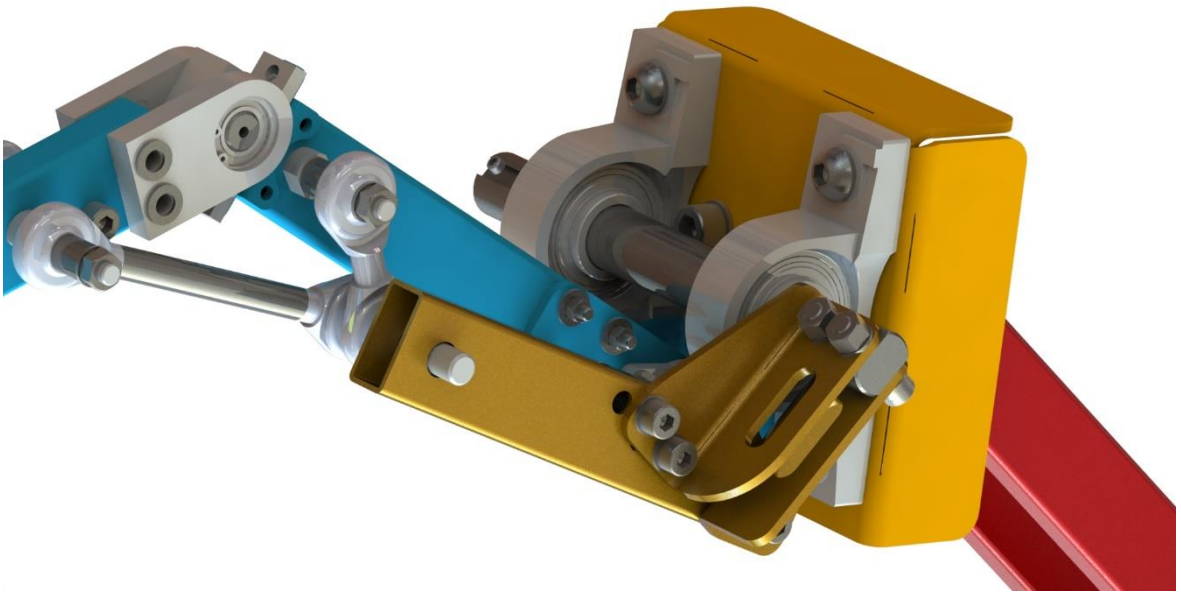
Subassembly of crankshafts on the base plate in “3-Joint” mechanism.
